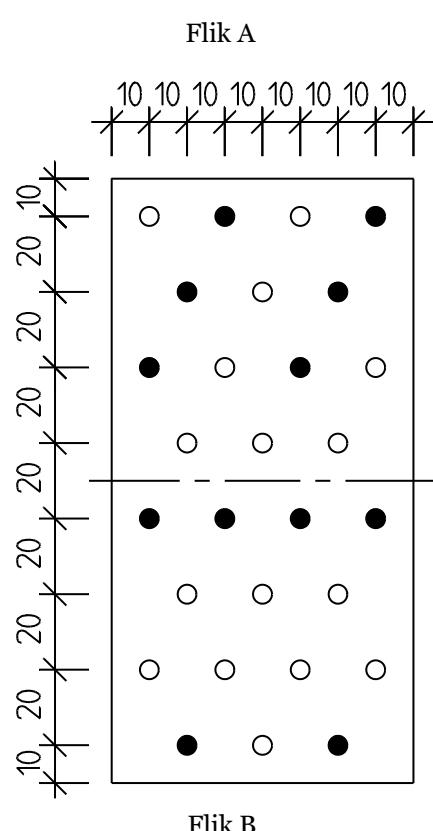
Dimensions of Angle Bracket 5528880 and 5588080
